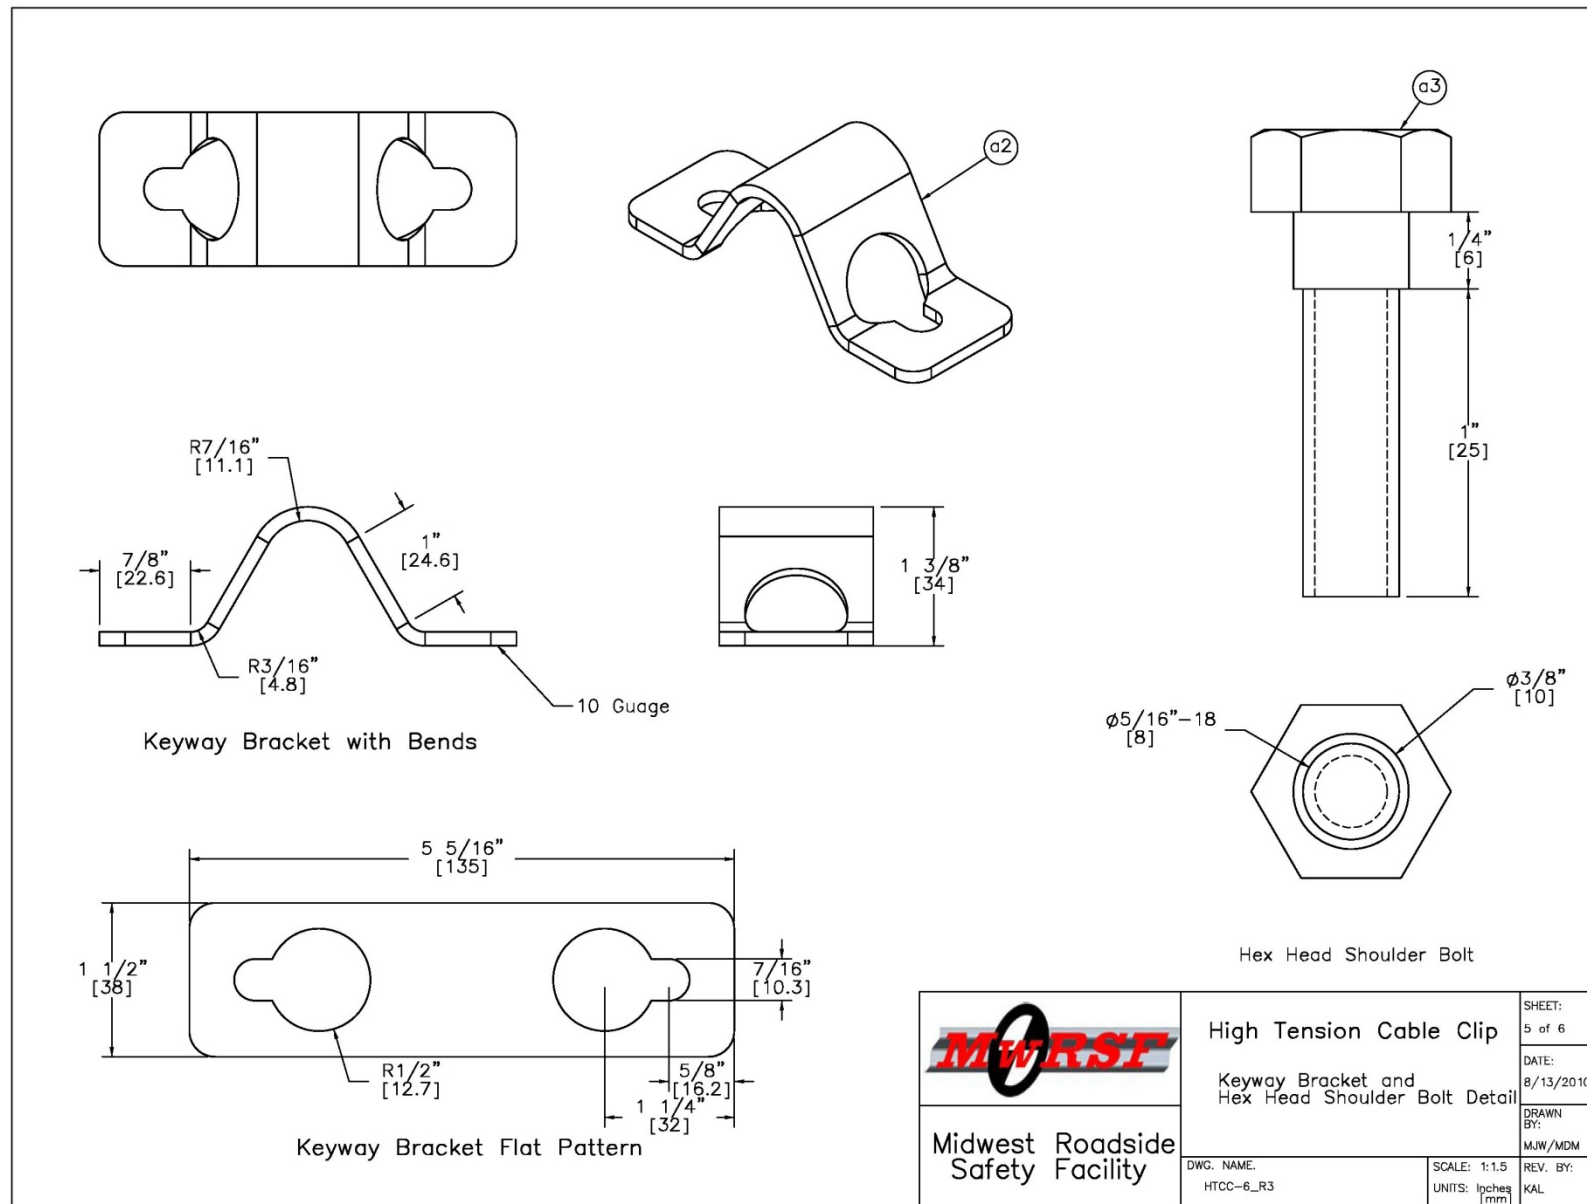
Keyway Bracket and Bolt Detail, Test No. HTCC-6
